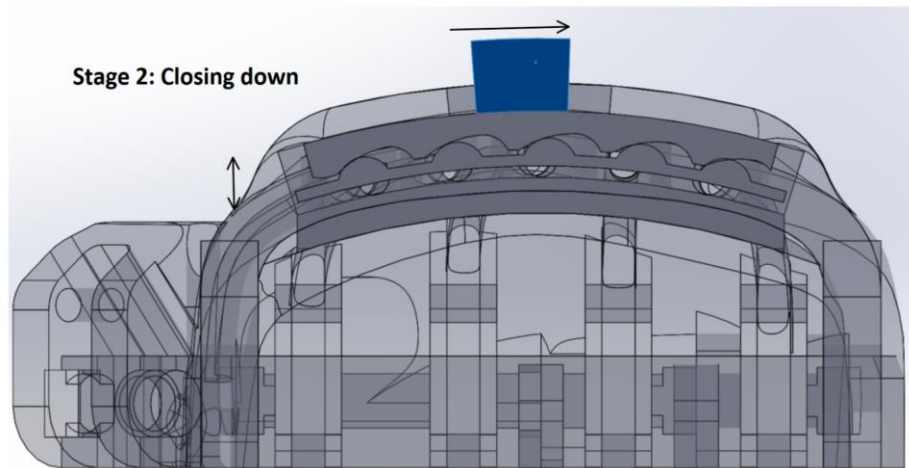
shows the grip lock mechanism, which consists of three parts: the switch, the shim, and the bottom plate. Figures 5, 6, and 7 show the working of the locking mechanism. In the first stage (Figure 5), the locking mechanism is not active and we can see the channels where the string passes through are still visible. In the second stage (Figure 6), as we move the switch from the left (grip lock off position) to the right (grip lock on position), the bottom portion of the switch interacts with the shim and begins to clamp down. At this stage we can see that the channels are increasingly less visible. By the time we reach the last stage (Figure 7), we can see that the shim part is completely touching the bottom plate, hence clamping down on the string and creating a grip lock. This mechanism will help the user create a tight grip on an object that will be held for a long time instead of relying on the wrist movement to actuate.
